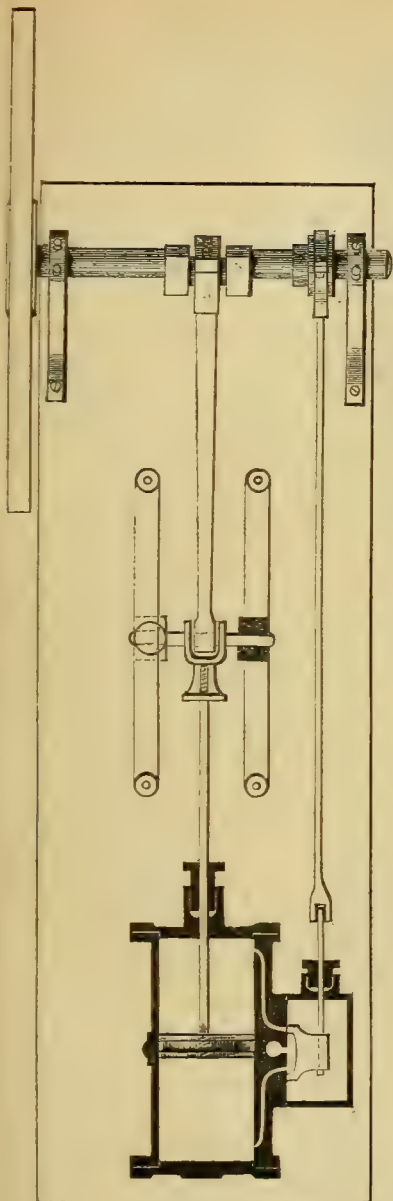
WORKING DRAWING OF DOUBLE ACTION HORIZONTAL SLIDE-VALVE ENGINE IN PLAN. SCALE, 6 INCHES TO 1 FOOT.
